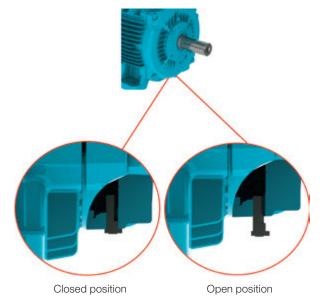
Detail of the rubber drain plug mounted in closed and open position
